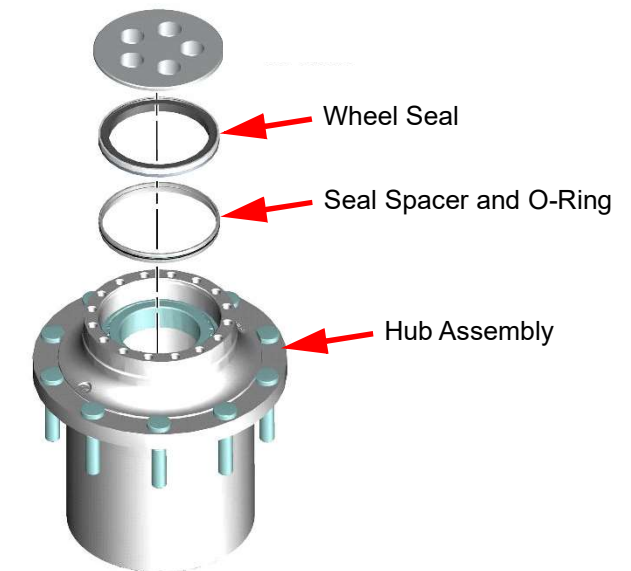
Installing Axle Bearing, Wheel Seal, Seal Spacer (with O-Ring) into Hub Assembly
